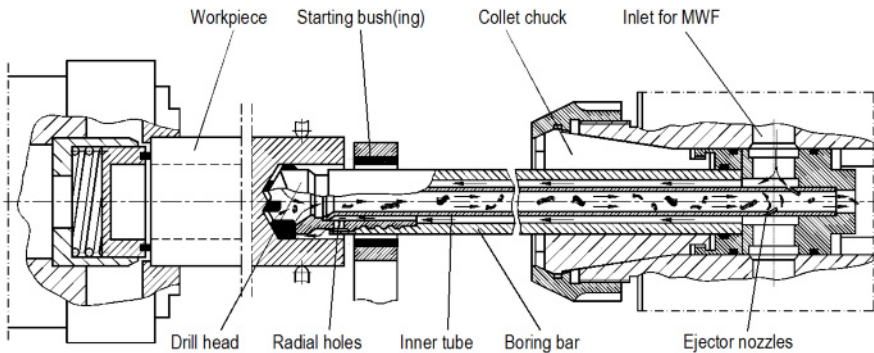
shows the principle of BTA drilling. The BTA tool consists of a boring bar and a single or a multi-edged drill head secured at its terminal end. MWF is supplied under high pressure through the inlet of the pressure head and flows through the annular channel between the boring bar and the bore wall towards the drill head. After cooling and lubricating the machining zone, MWF carries away the chips through the interior of the drill head and boring bar. In contrast to gundrilling, the returning chips do not come in contact with the bore wall and thus a better surface finish can be achieved.
